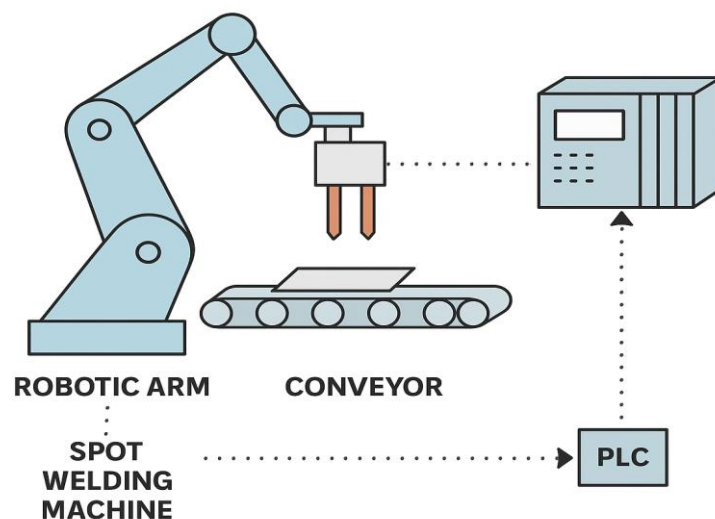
Automated Robotic Spot-Welding System With PLC Integration
